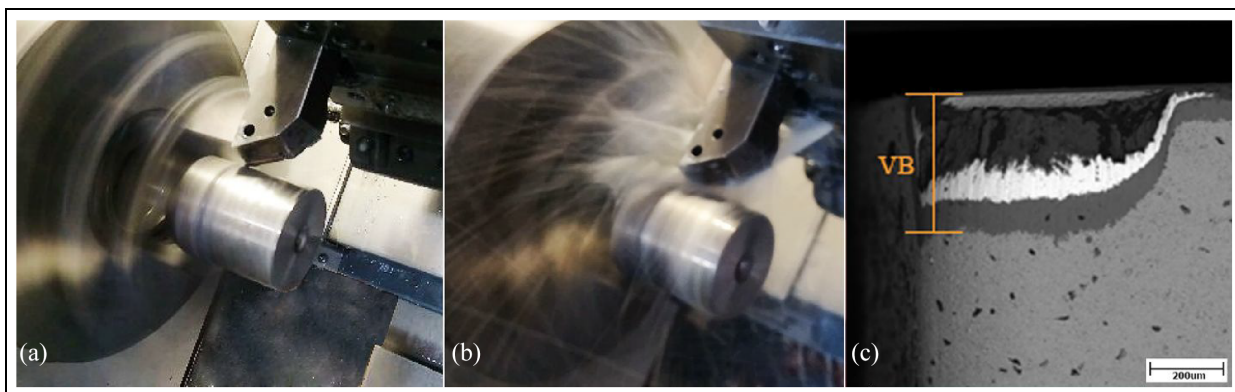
View of AZ91/SiC machining under different conditions: (a) dry machining, (b) wet machining, and (c) flank wear measurement.
